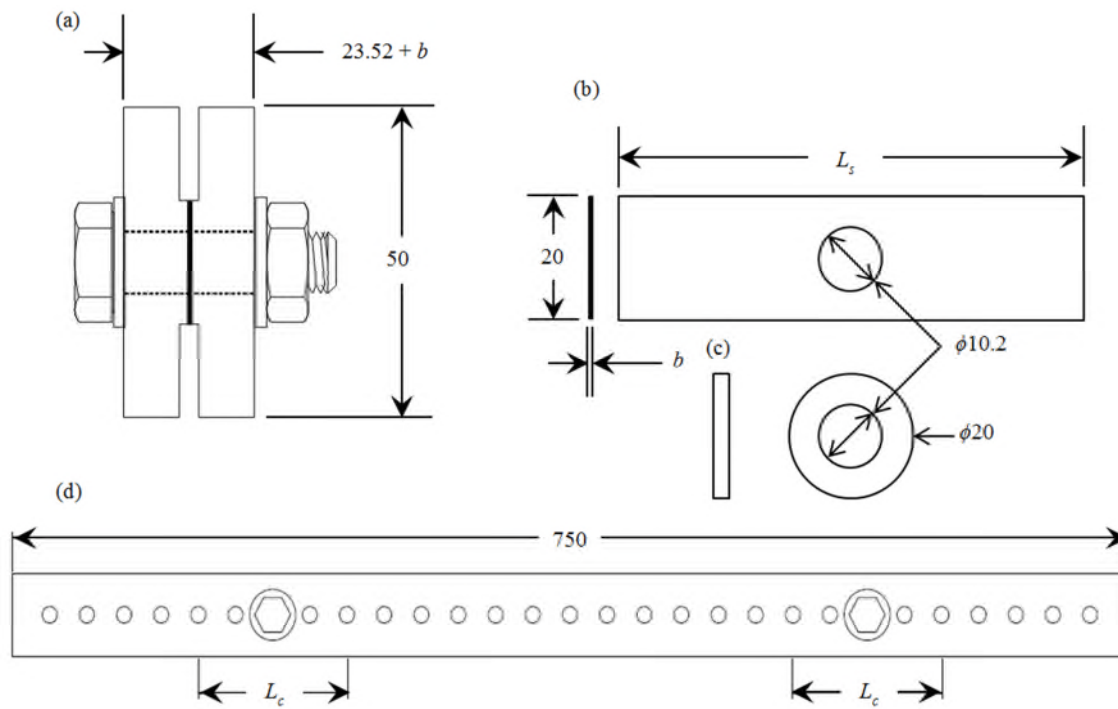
Sandwich Beams with shims (a) cross-section (b) plan views of a shim placed between the two beams. L_s is the length of the shim, b is the sum of the thickness of one or multiple shims. (c) Plan views of the 3.2mm thick washer (d) plan view of the structure. L_c is the unknown length of the bound region. Dimensions in mm.
